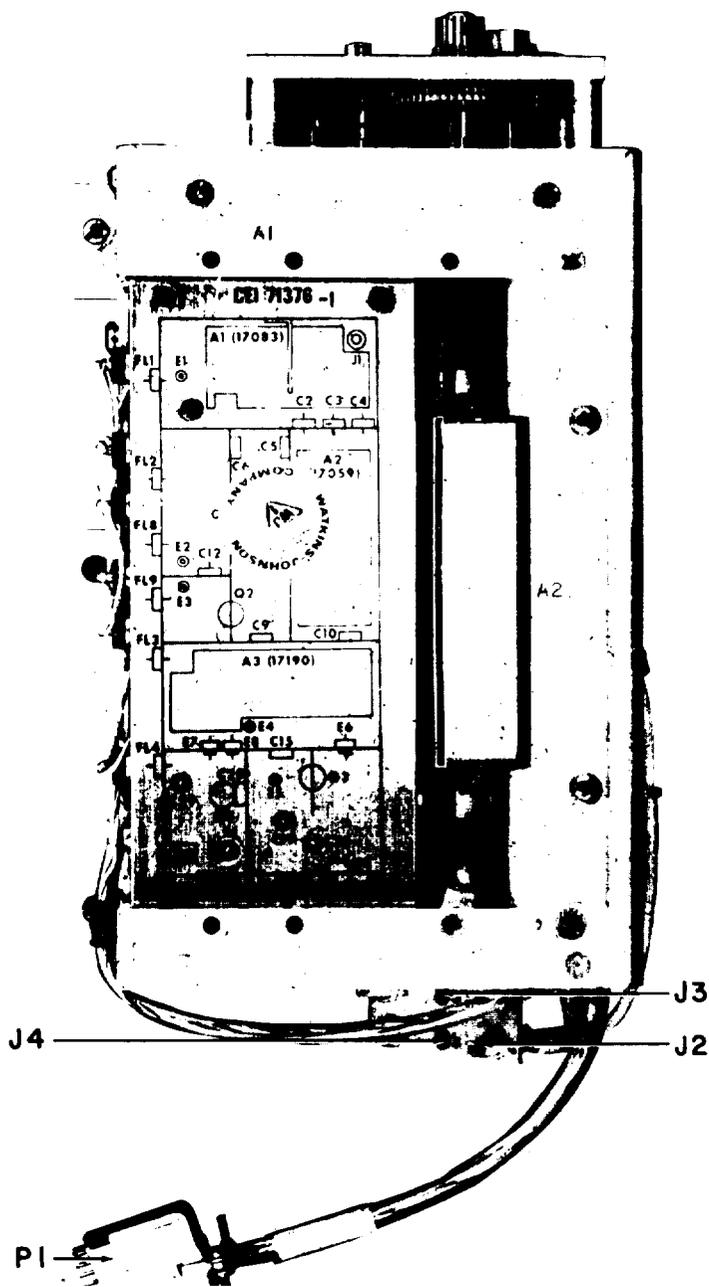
WJ-9124 250-500 MHz Tuner Assembly, Bottom View, Location of Components
